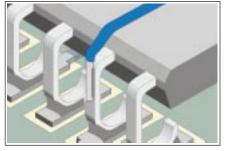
Not Recommended* Wire soldered to lead, over component.
